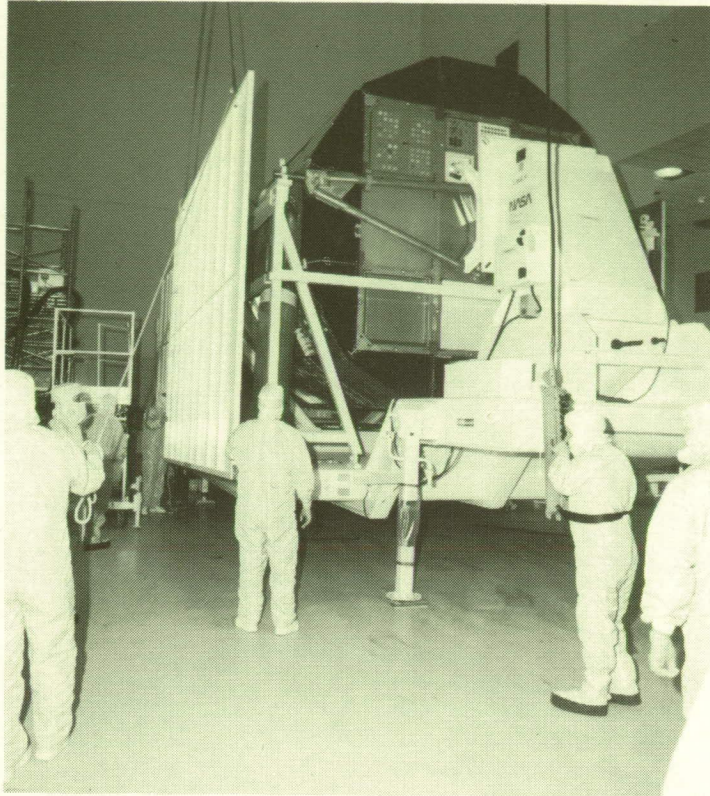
LDEF Assembly and Transportation System (LATS) cover being removed in Spacecraft Assembly and Encapsulation Facility II (SAEF II).
